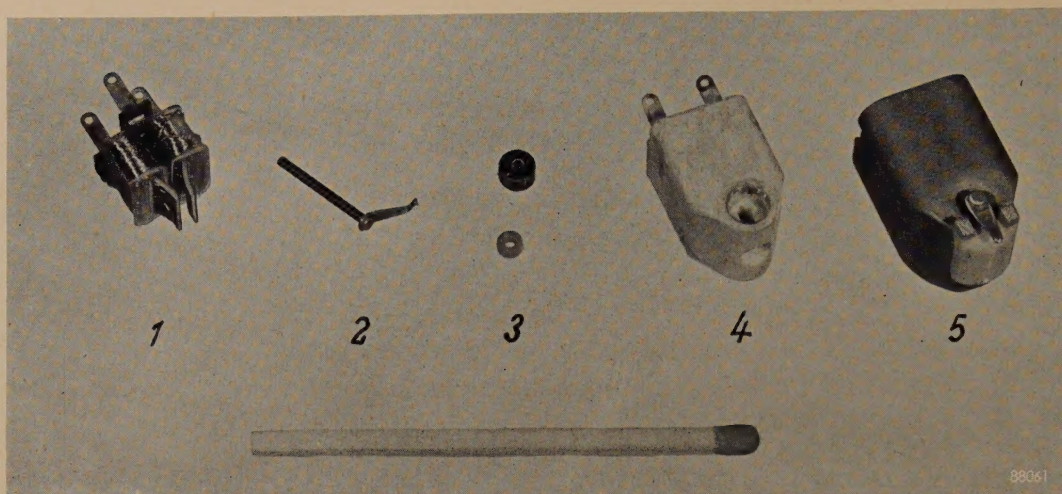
Component parts of the magnetodynamic pick-up. 1 yoke with coils; 2 magnet with needle arm and needle; 3 rubber bush and p.v.c. bearing; 4 block of polyester resin which is cast around the yoke and coils, place being left for the insertion of magnet and bearings; 5 the block 4 complete with bush, bearing and magnet and shrouded in metal housing for magnetic and electrostatic screening; on either side of the needle arm are protective shoulders.
